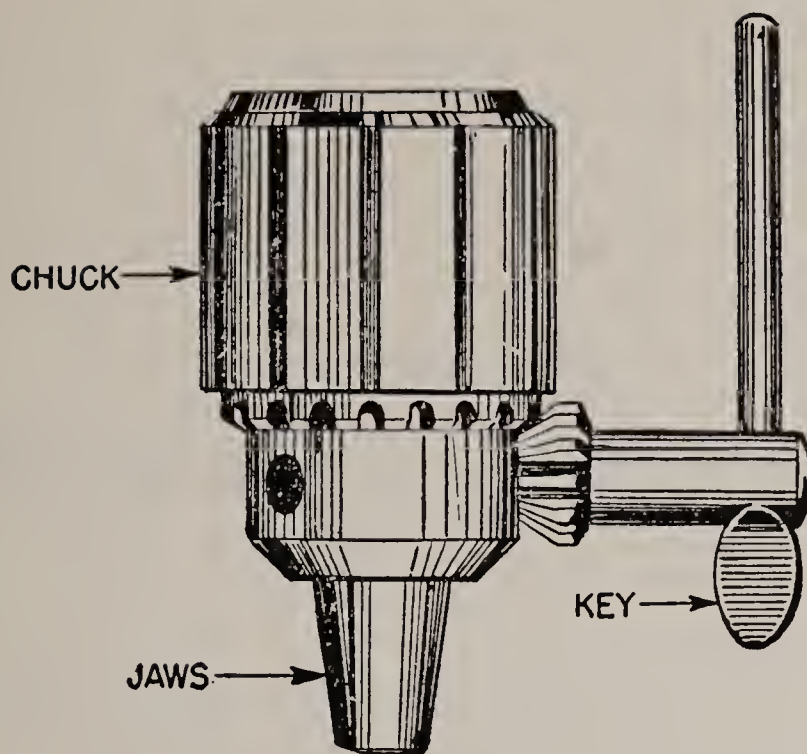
Typical key-type gear chuck used in drill presses. Principally, the chuck is a clamping device used to connect the twist drill with its driving spindle. Chucks are manufactured in various sizes corresponding to the sizes of twist drills with which they are used. To mount the twist drill in the chuck, place the shank of the twist drill in the chuck as far as possible between the three jaws and tighten the chuck key.
